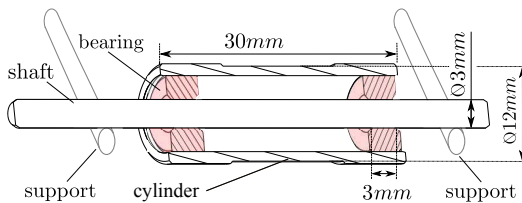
Cross section of cylinder unit with bearings, shaft and support.
